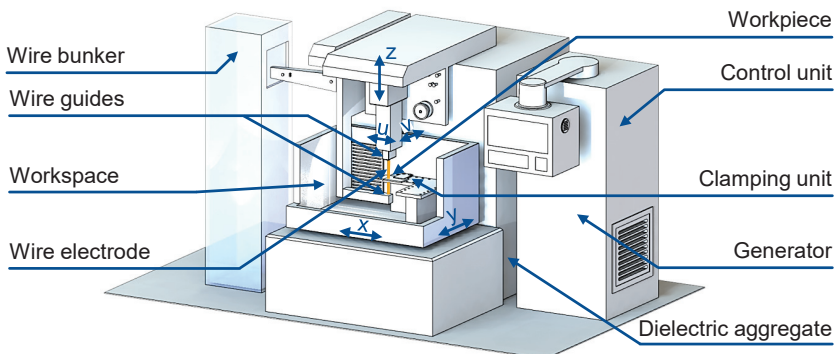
Schematic of a wire EDM machine according to [HENS17]
